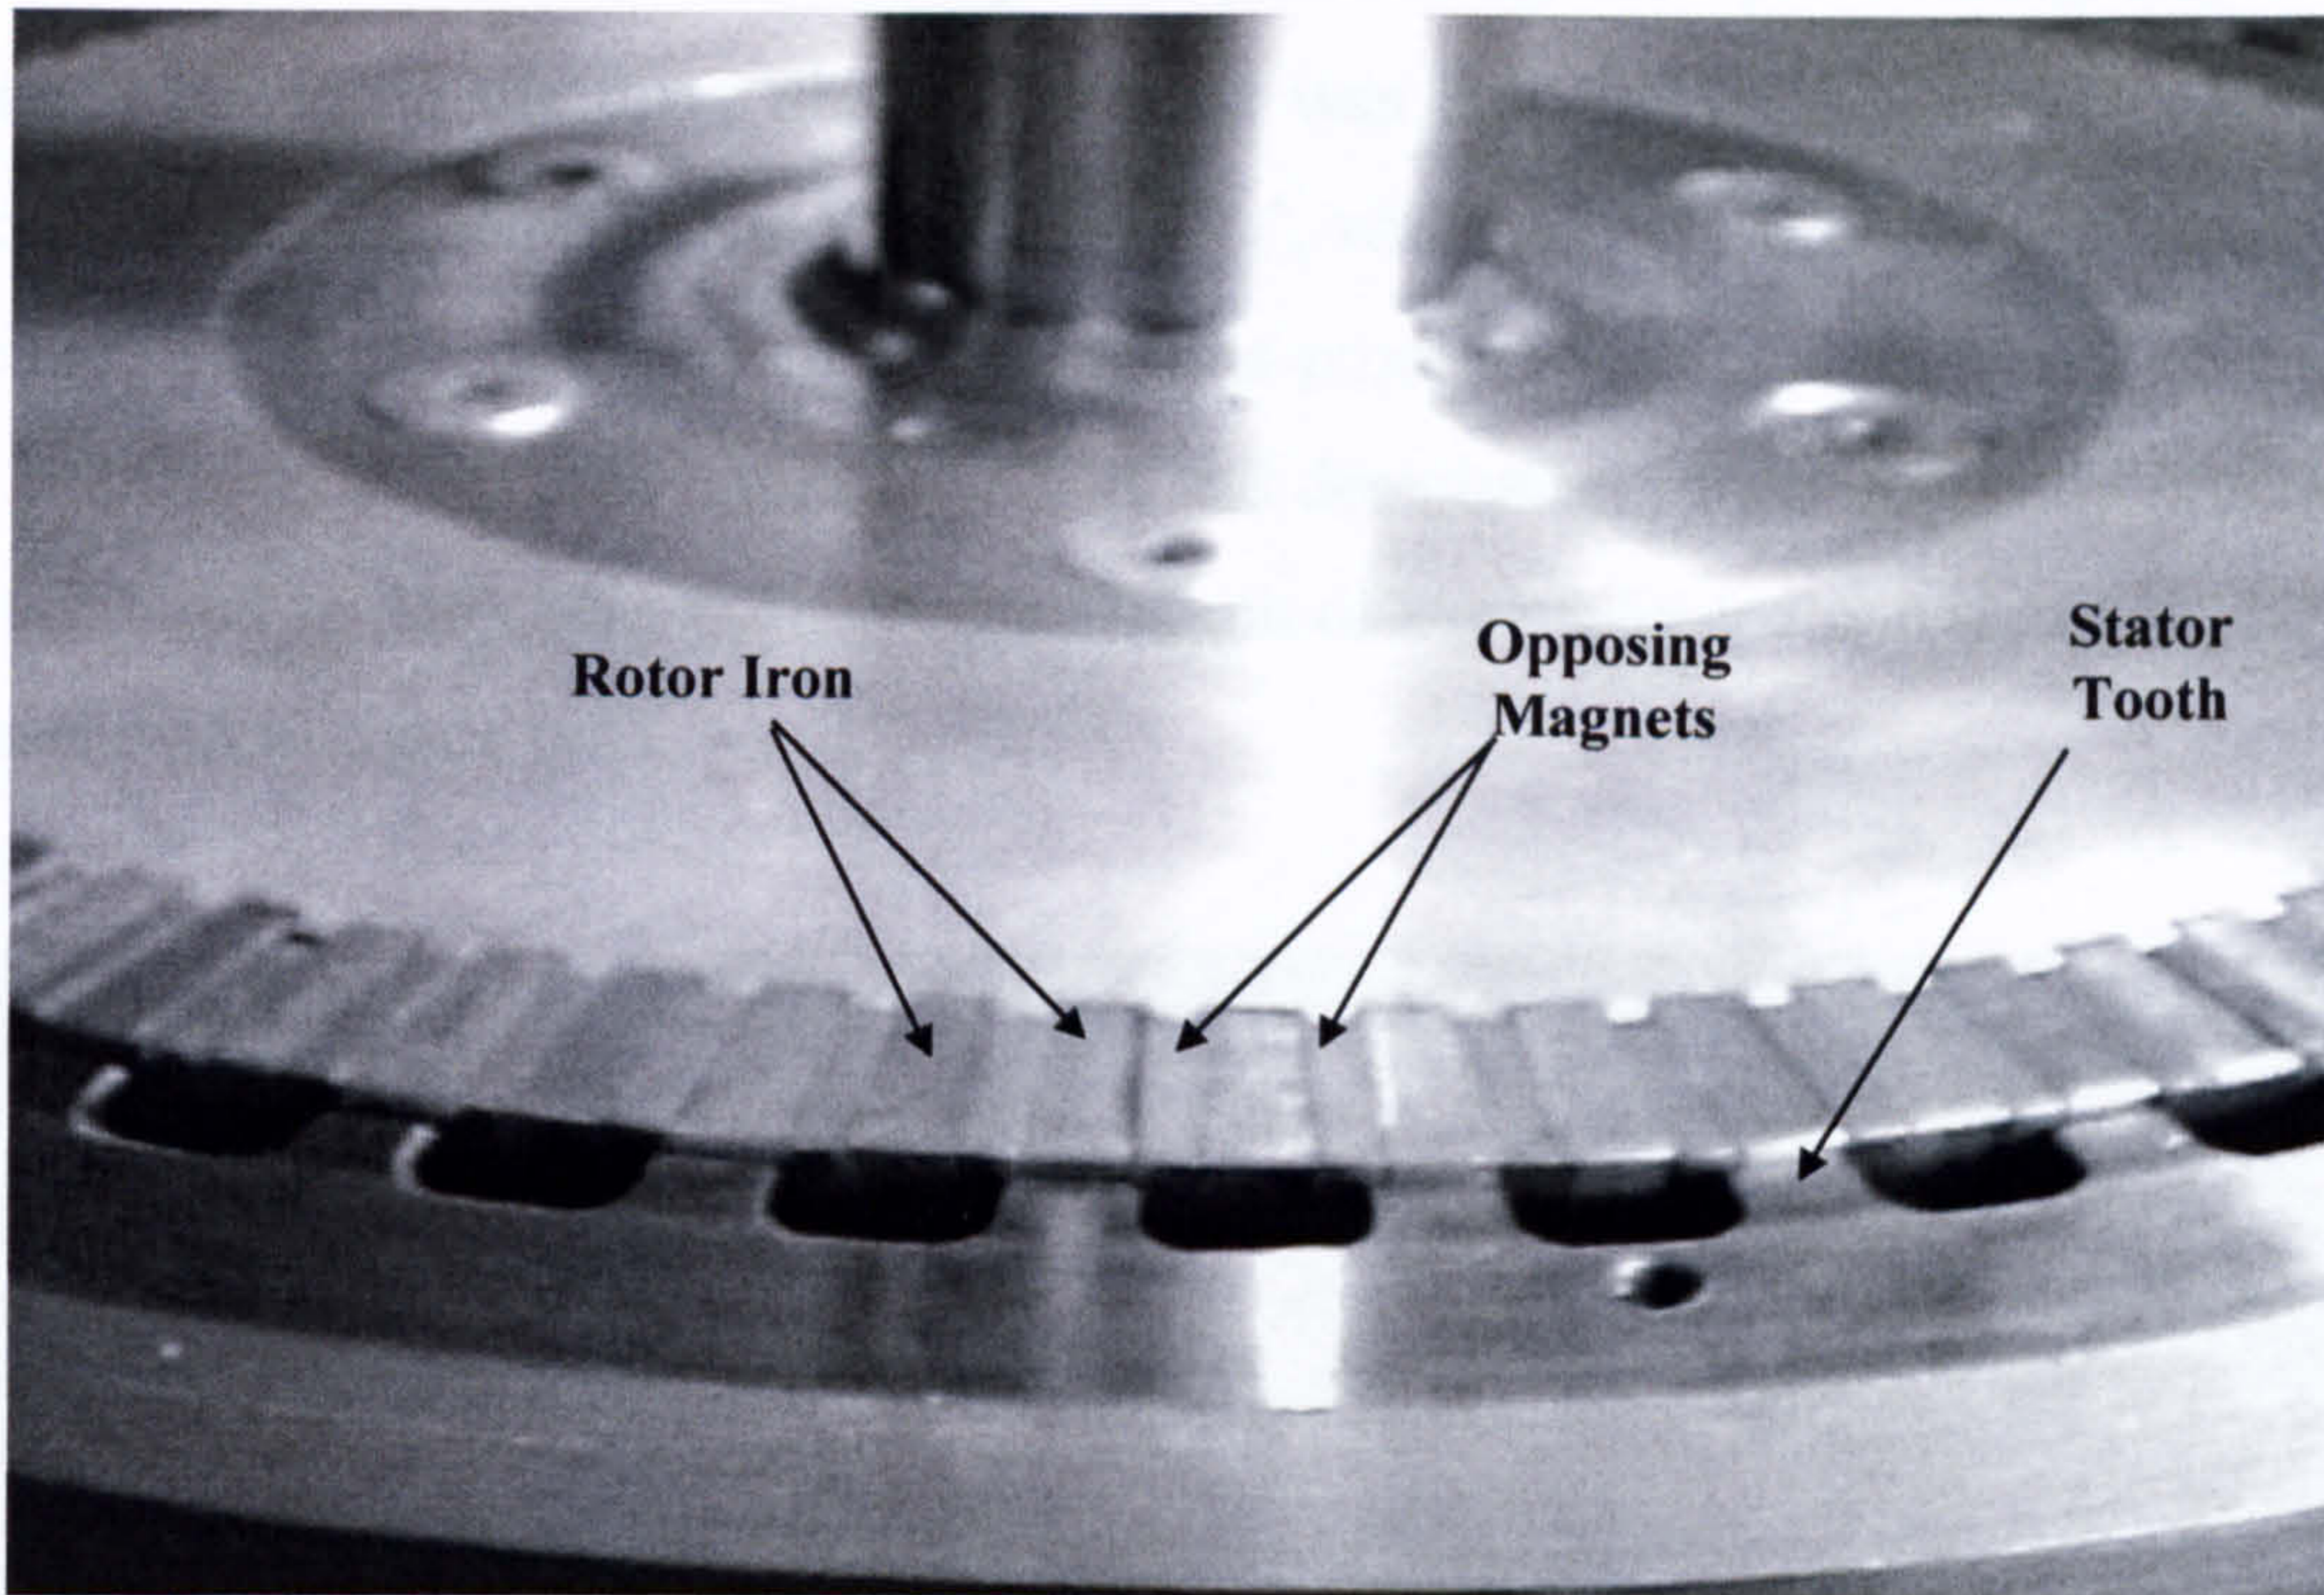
Detail photograph of the rotor and stator during the assembly procedure
